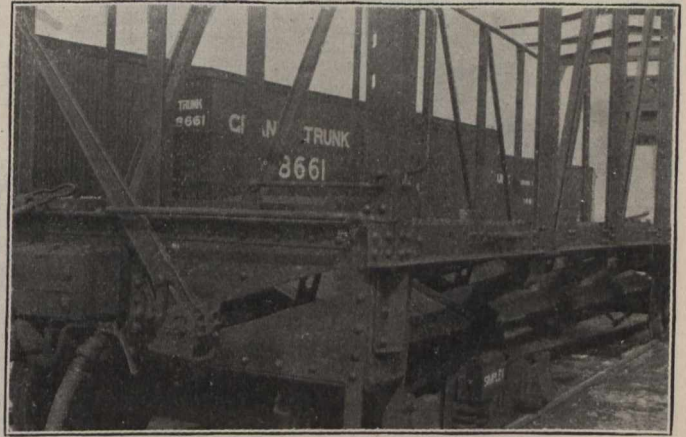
Near View of Operating Gear and Drop Bottom Construction.
